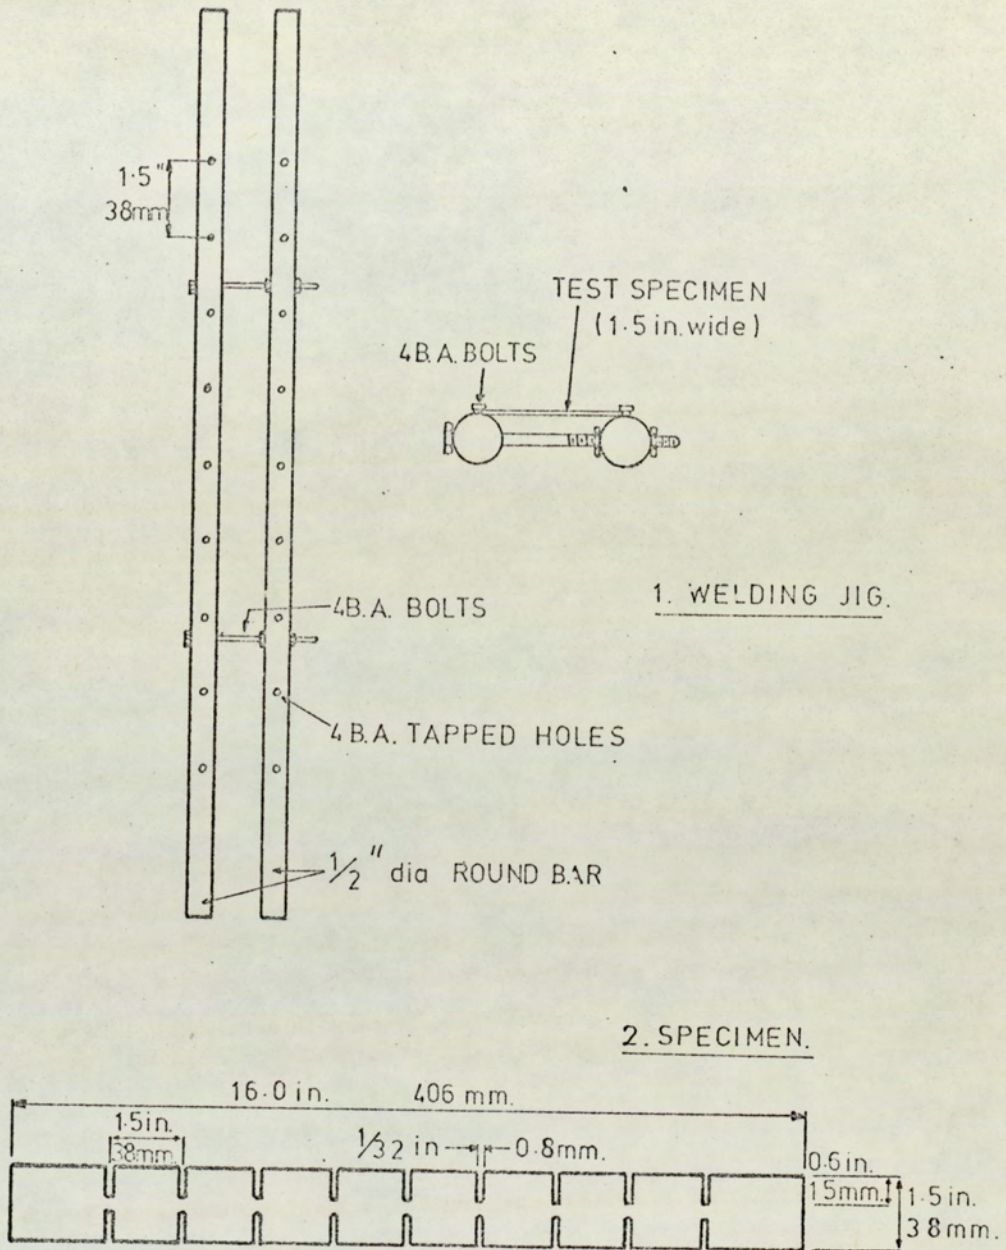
Diagram of the Welding Jig and Specimen used for the Huxley Test⁸⁰.
